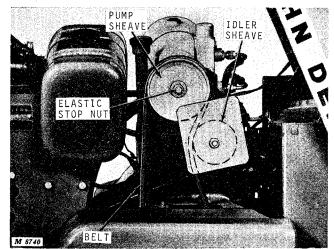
Installing Drive Components - In-line Unit 110 and 112 Tractor with Tecumseh Engine
